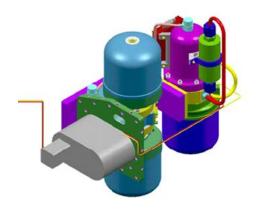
, TRW, Pulse Tube Cooler with circulator linear compressor [16]
